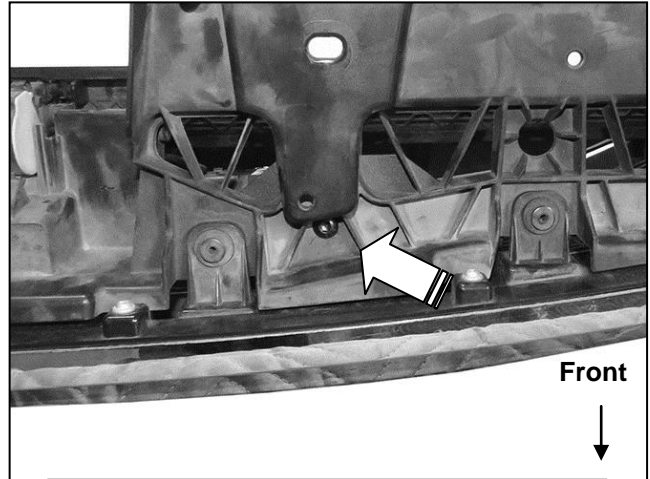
F-150 Models. Shutter assembly in back of grille. Remove center lock (arrow) to disassemble driver/left side of shutter assembly
